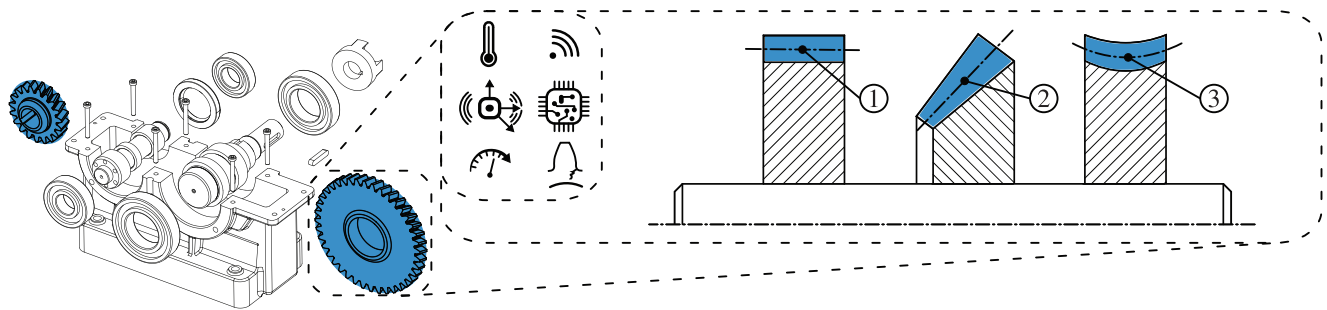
Sensor-integrating gear box, focusing on sensor-integrating gears and their measuring tasks, exemplified by a cylindrical gear (1), a bevel gear (2), and a worm gear (3).
